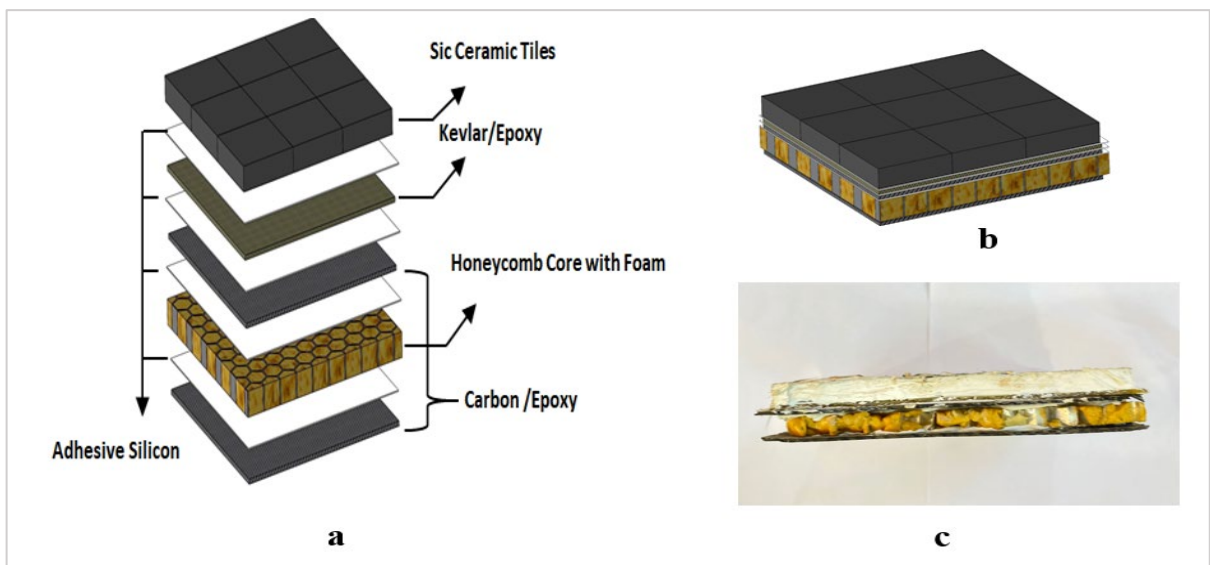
Hybrid sandwich body armor (second sample S2) after assembly and fabrication: (a) Schematic of arrangement of layers (b) Schematic of Isometric view (c) Photograph of Side view
